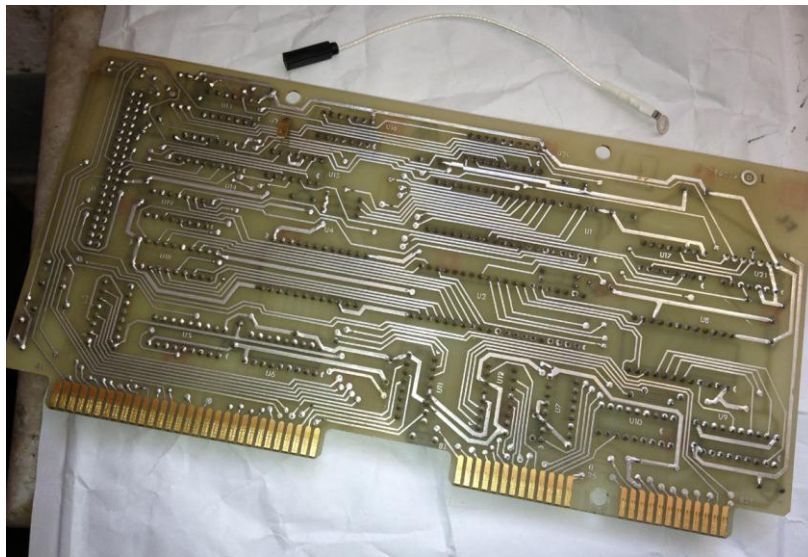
The *Front Panel Encode* MFP-A1A1 Card 796056-1 (rear view); in the picture is also shown the MFP-P21 ground cable.
